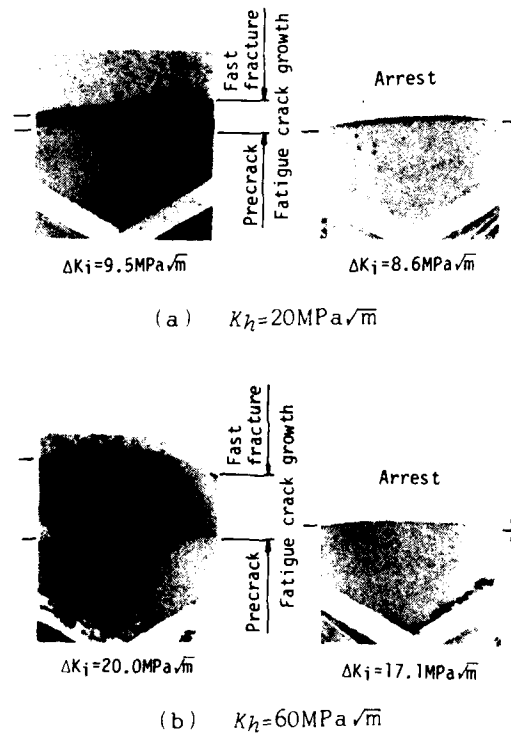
Macroscopic fracture surfaces (SFVQ1A).
